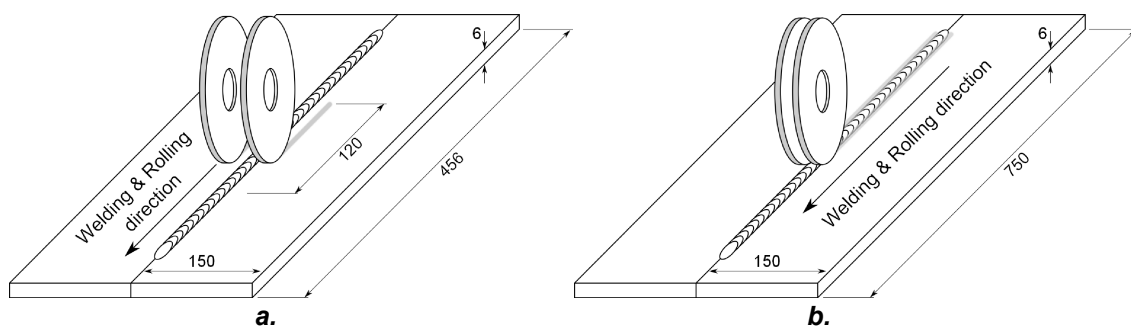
Schematic representation of PoWR when rolling with the dual flat roller. *a.* Rolling beside the weld bead. *b.* Rolling the weld toes (Dimensions in mm).
